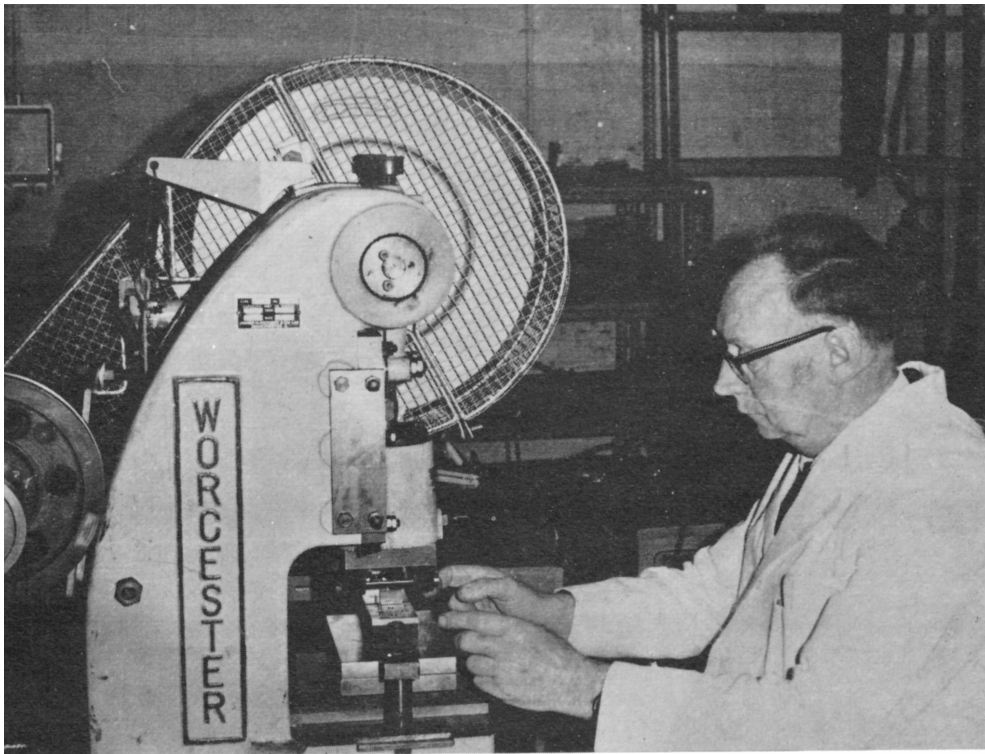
ARRANGEMENT OF DIE AND PRESS TOOL
